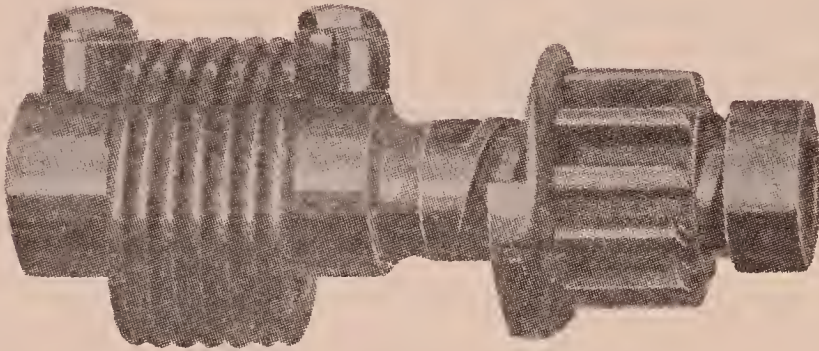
The Bendix drive showing a use of a triple-threaded screw.
